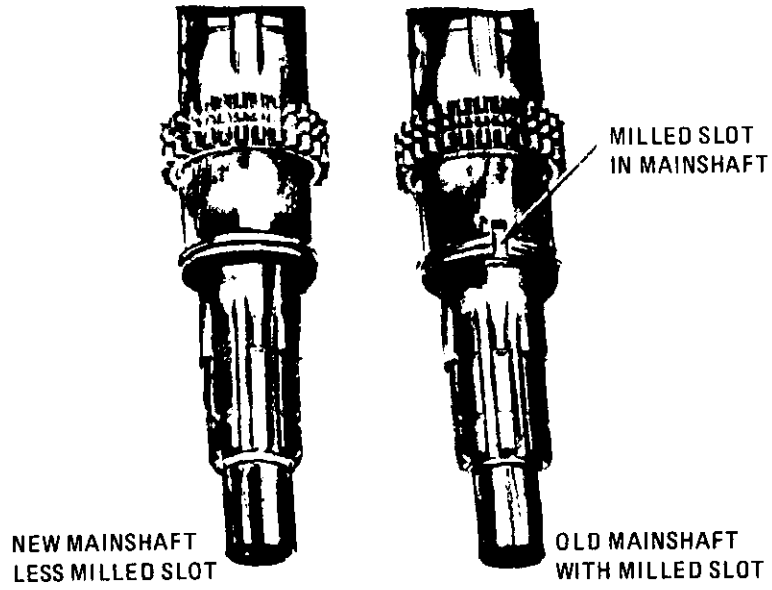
MAINSHAFT WITH AND WITHOUT MILLED SLOT
